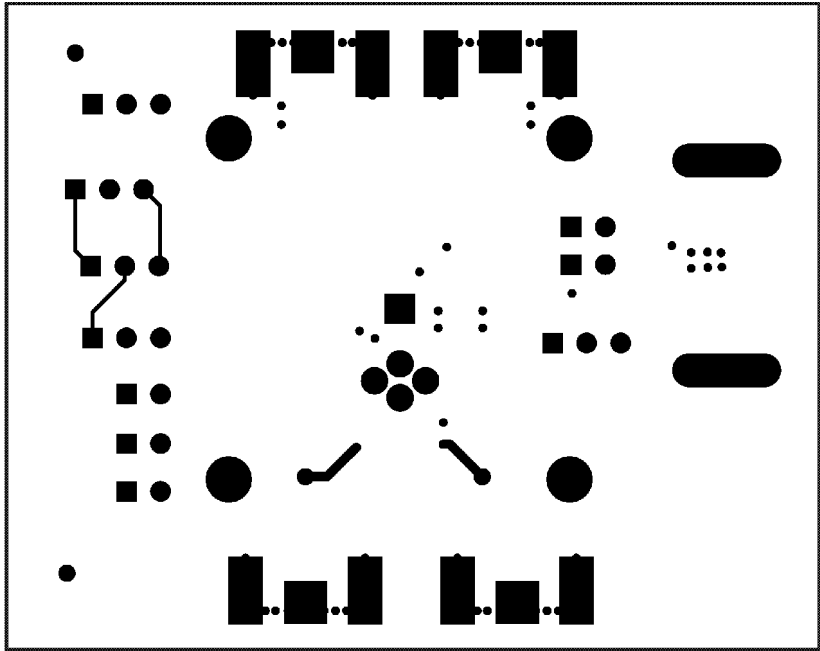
MAX3967A EV Kit PC Board Layout - Solder Side..
